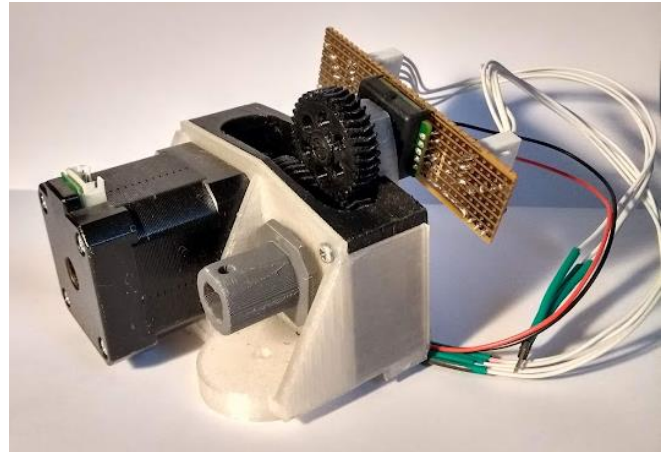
3D Printed Upper Leg Actuator Version 1.
